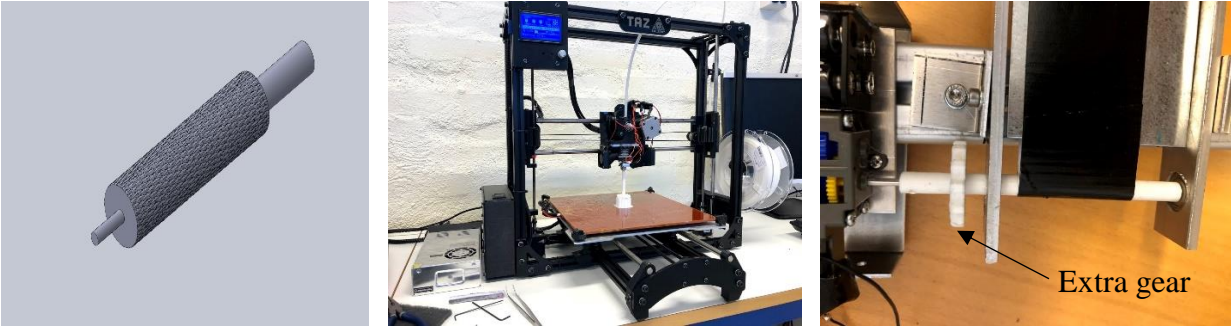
Roller #1 Modification [Left: CAD model, Middle: 3-D printer printing the modified Model, Right: Modified model]
